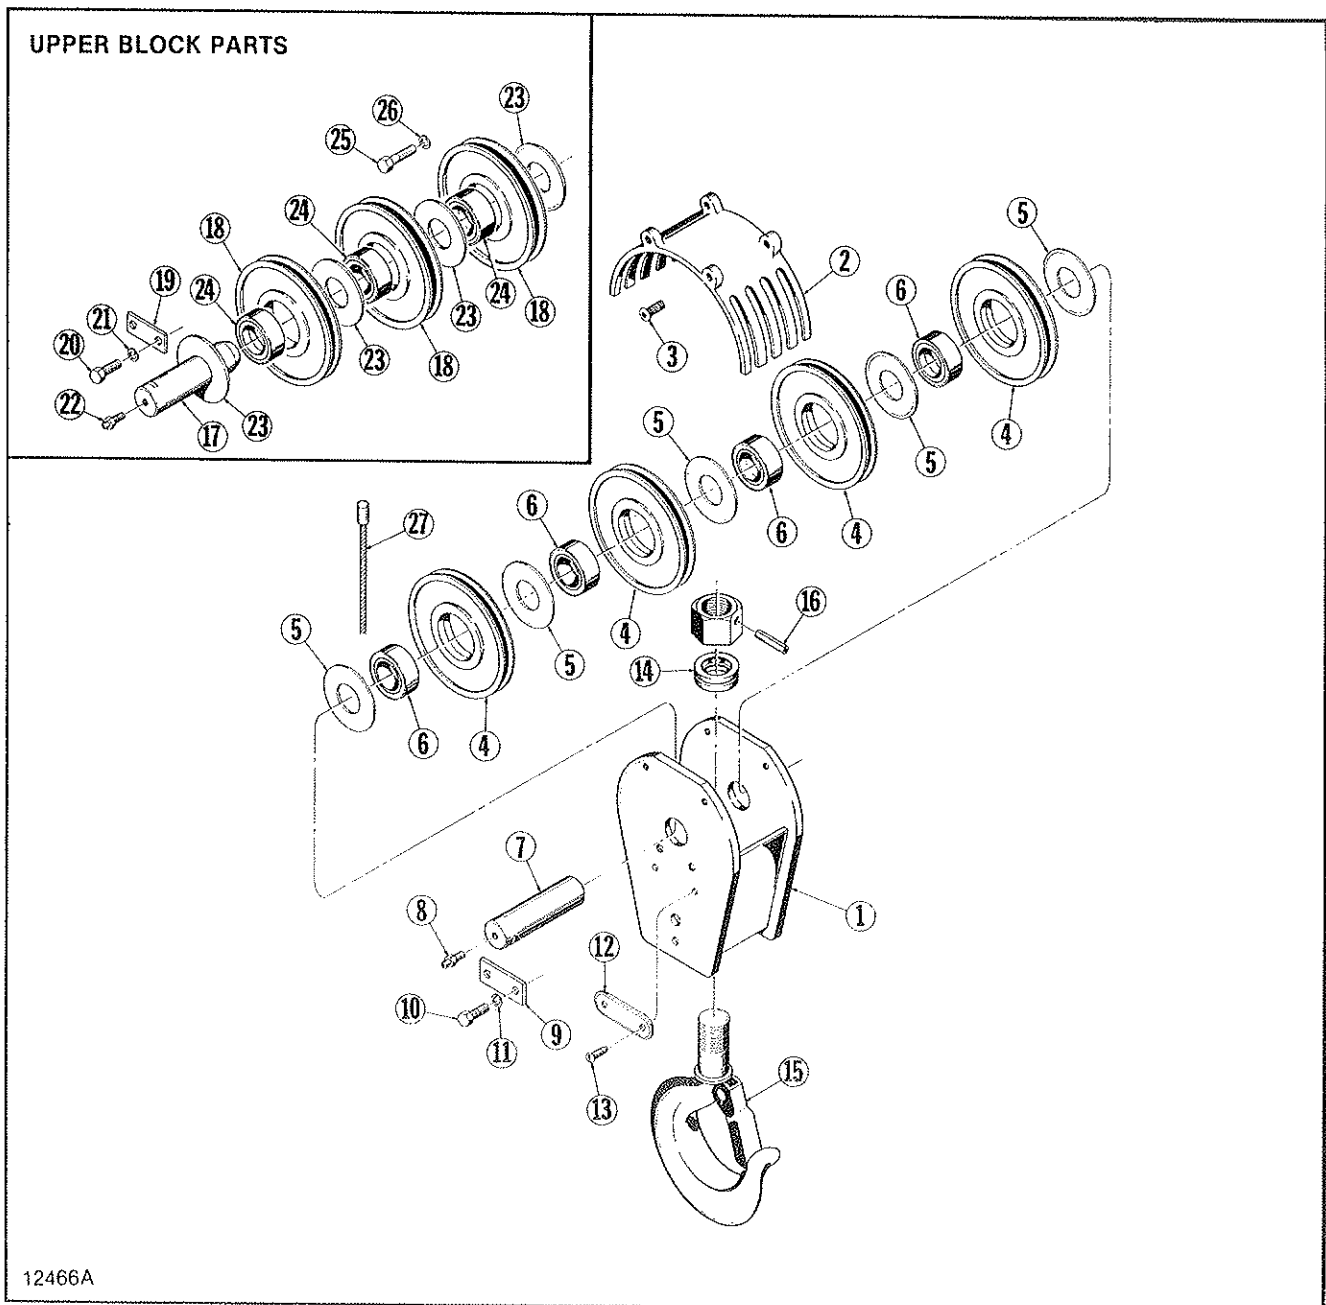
Upper and Lower Block Parts Including Hoist Rope.
